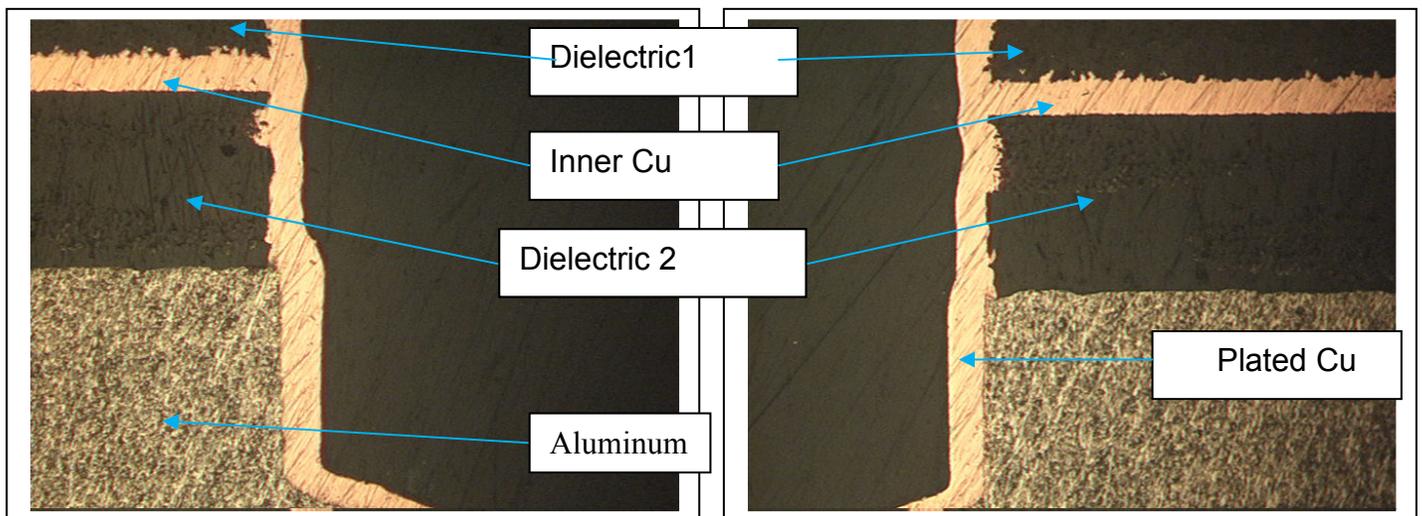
Exploded view of the cross section of a CPM processed blind-hole. Note the robust bonding of the 1 mil thick electroplated copper to the dielectric, inner layer copper and aluminum.
